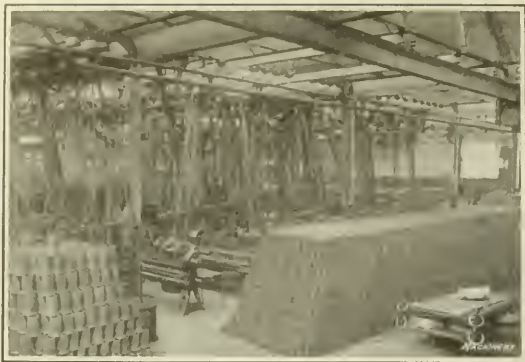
Troughs are also used for carrying cylindrical work, such as pistons, from machine to machine in the plant of the Ford Motor Co. This illustration shows a somewhat different arrangement from that illustrated in the Cadillac factory. An idea of the enormous rate of production in the Ford shops will be gathered from the stack of pistons shown in the foreground of this illustration
